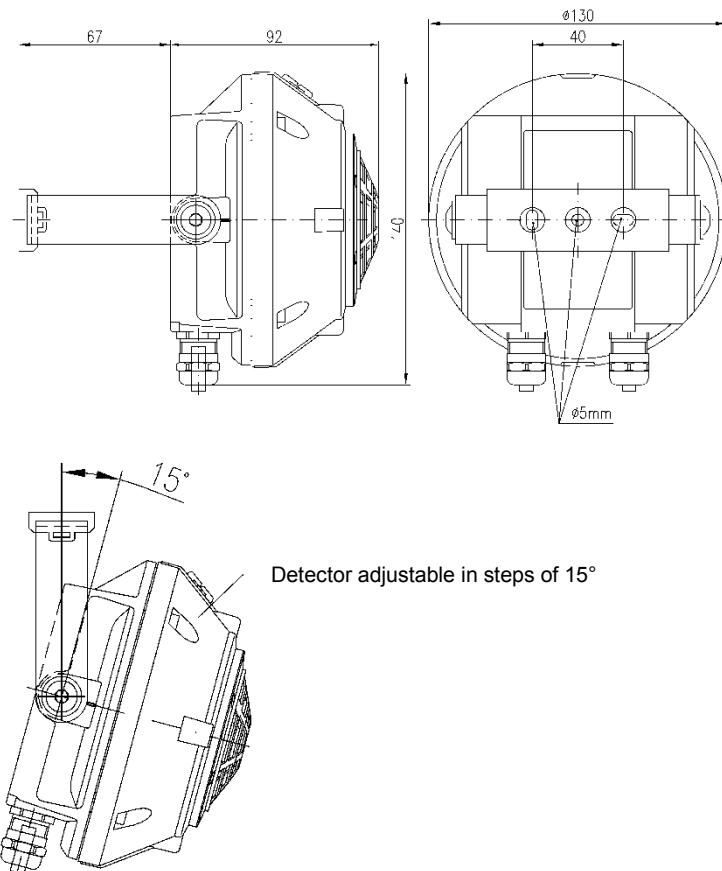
FMX5000 UV.ESSEN with bracket installation (dimensions in mm)
